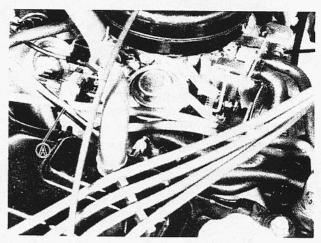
(A) Special Tool (Carburetor Adjuster 09918-38310)
